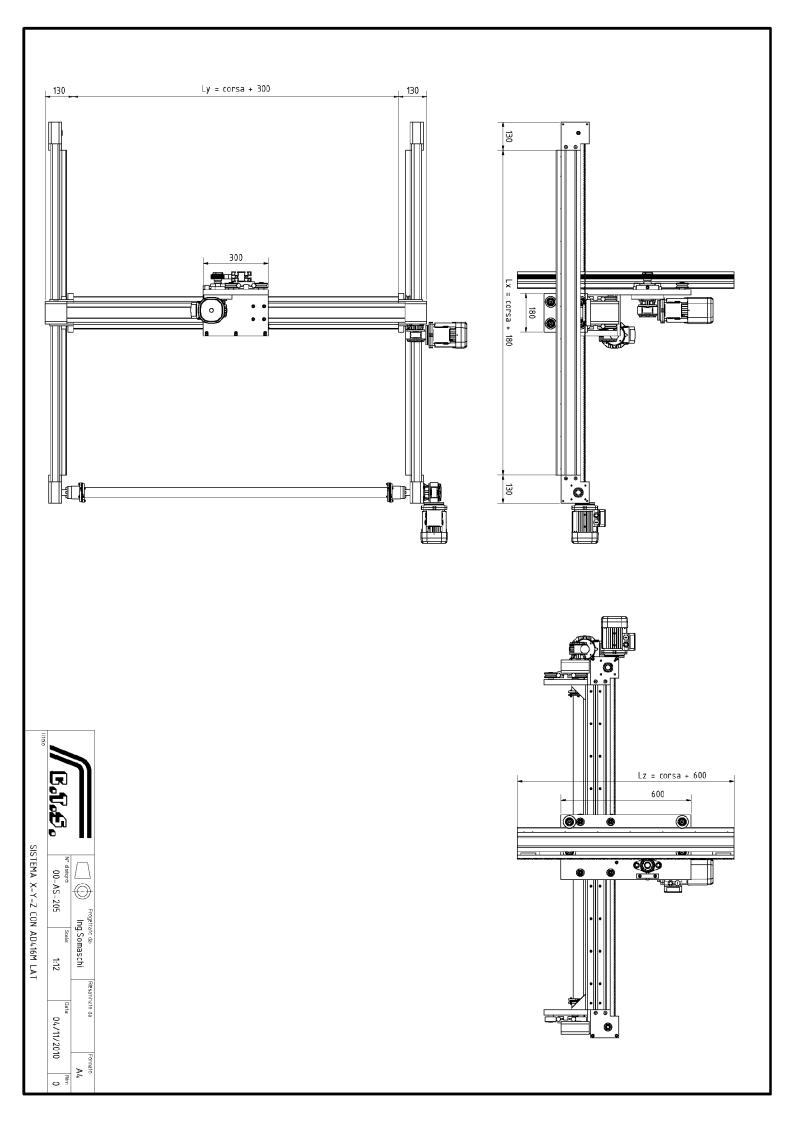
AS-205 MIDDLE-HEAVY VERSION WITH AD416 GUIDES
